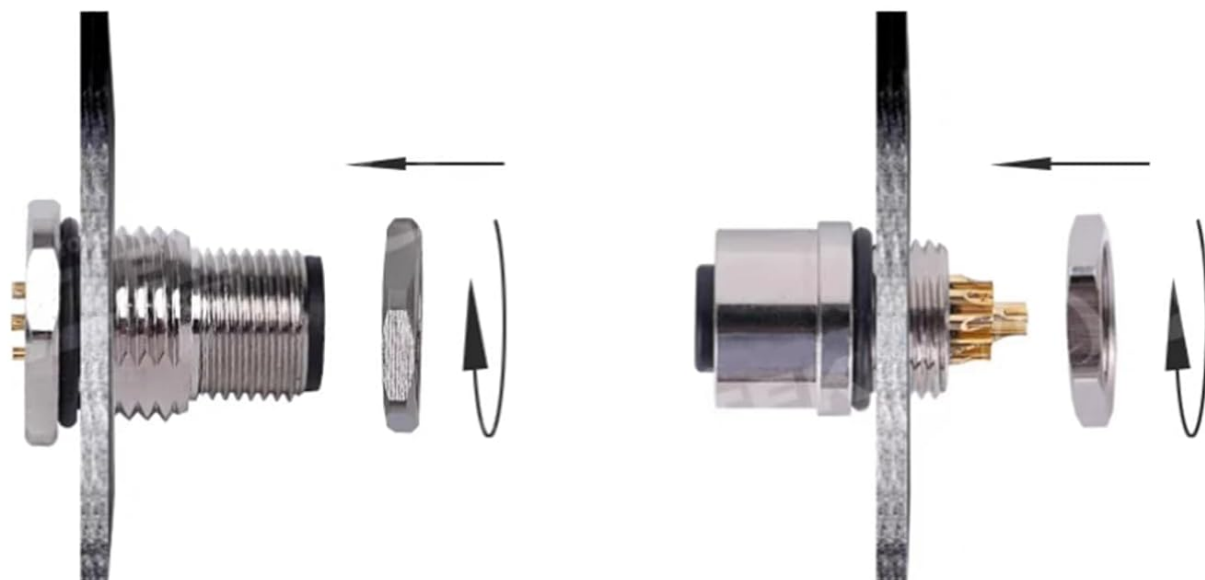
Diagram illustrating the installation process for M12 connectors. The left side shows installation from the front of the board, and the right side shows installation from behind the board, both secured with a threaded nut.
